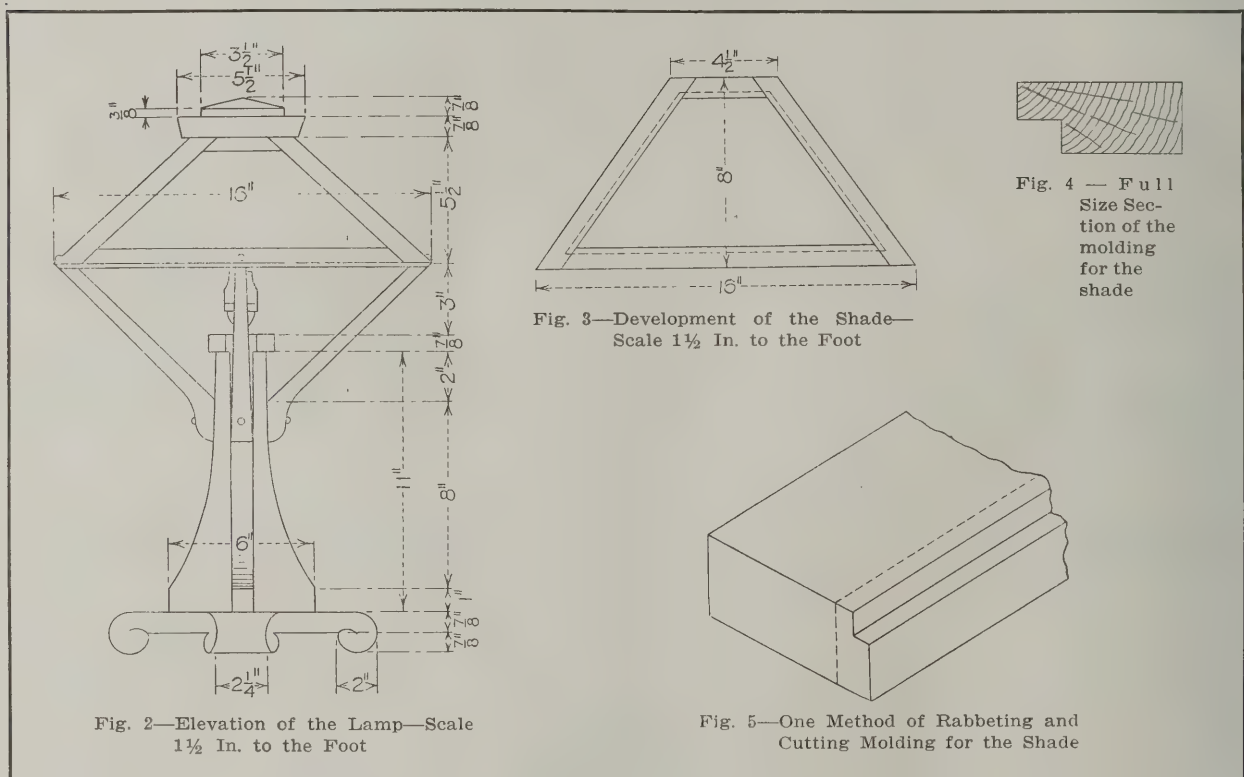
Elevation of the Lamp—Scale 1 1/2 In. to the Foot
